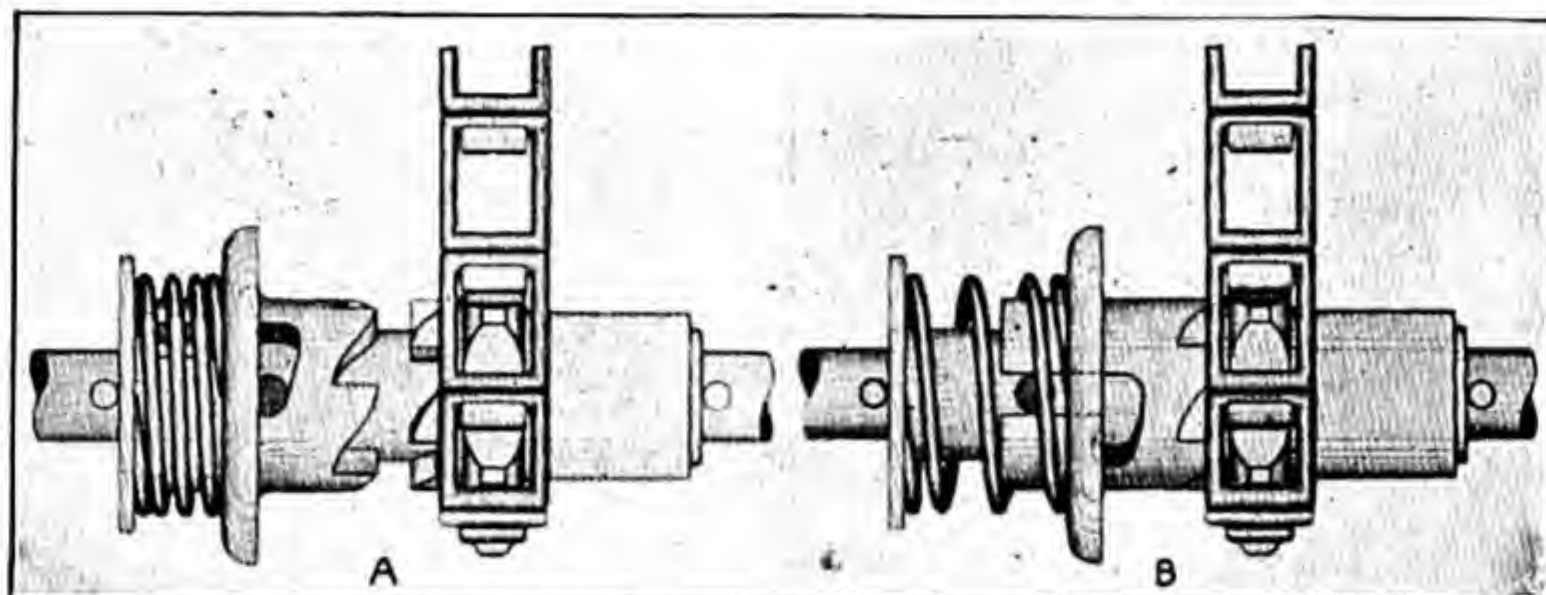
Positive type of clutch: A, clutch parts disengaged; B, clutch parts engaged to transmit power.
